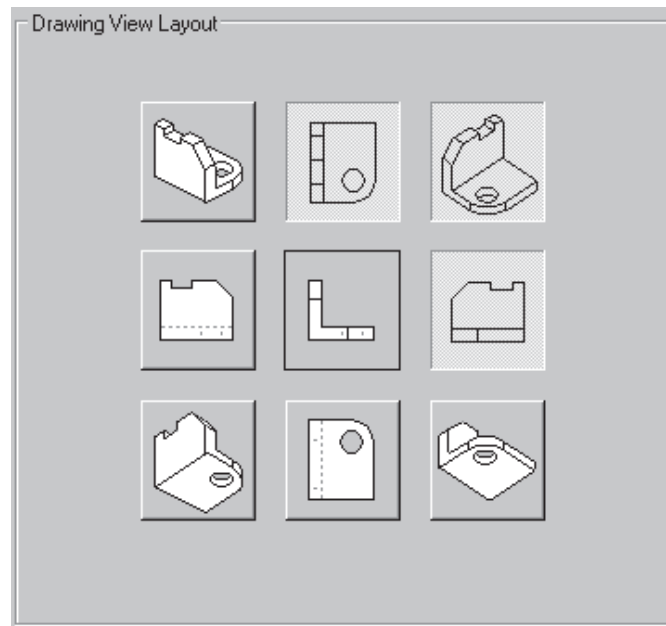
The *Drawing View Layout* area of the *Drawing View Creation Wizard* dialog box
